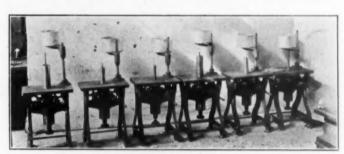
MACHINES WITH DIES IN PLACE READY FOR RAMMING.
